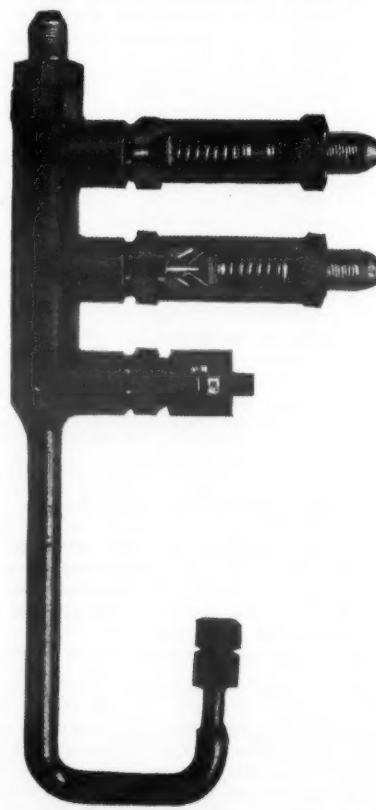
Cross-section of rubber check valve showing condenser and absorption checks.
